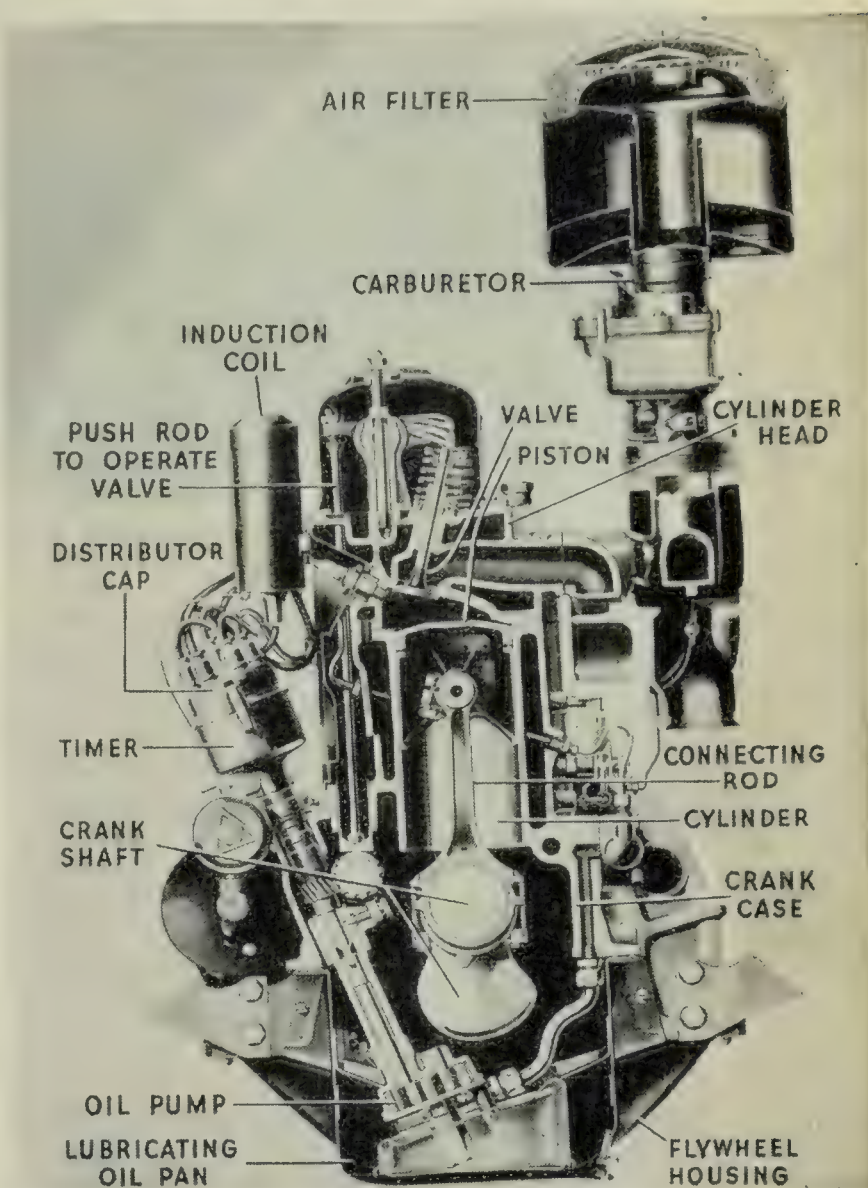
A cut-away view of a modern automobile engine. This is known as the over-head valve type of engine. Find out how the valves are arranged in other types of engines. Also find out the purpose of any of the labelled parts that you do not know about. After you have studied the next few pages, examine this picture again to see how many of the parts you can explain. (General Motors photo)
